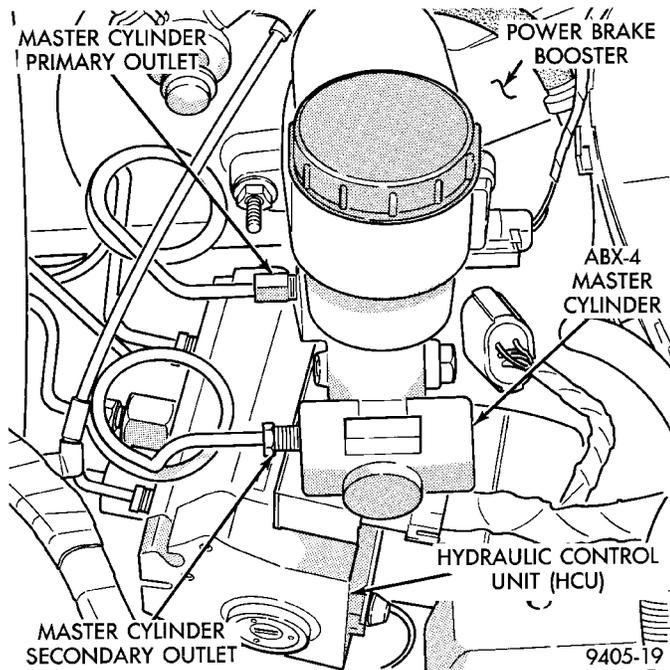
ABX-4 Master Cylinder And Brake Booster Assembly
